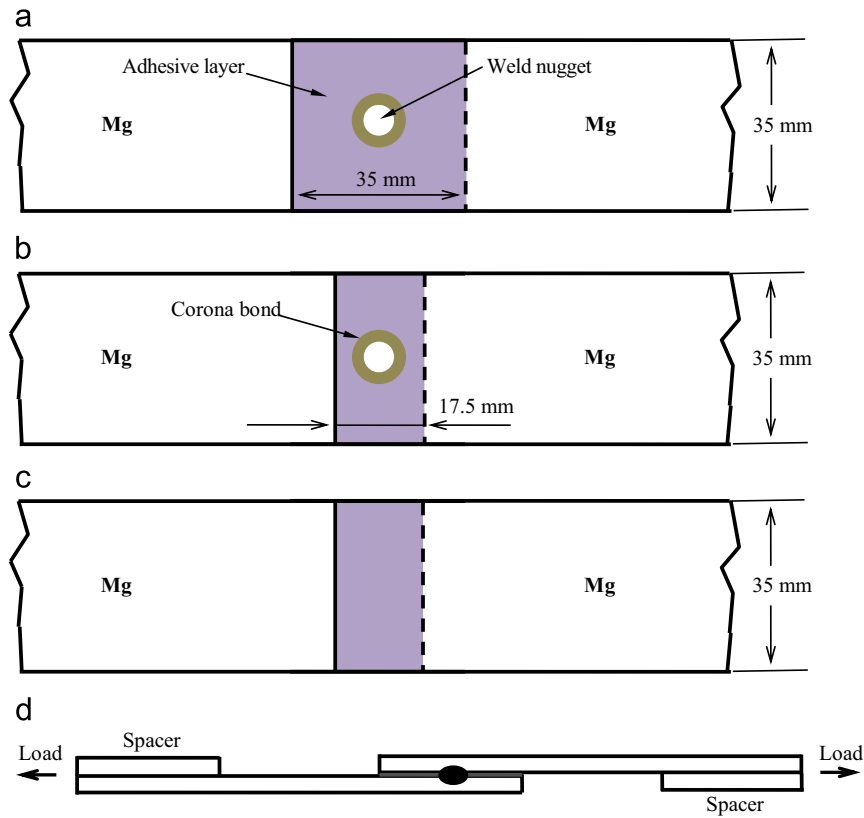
Schematic illustration of (a) WB-1 Mg/Mg joint, (b) WB-0.5 Mg/Mg joint, (c) AB-0.5 Mg/Mg joint, and (d) tensile and fatigue test specimens with two spacers.
